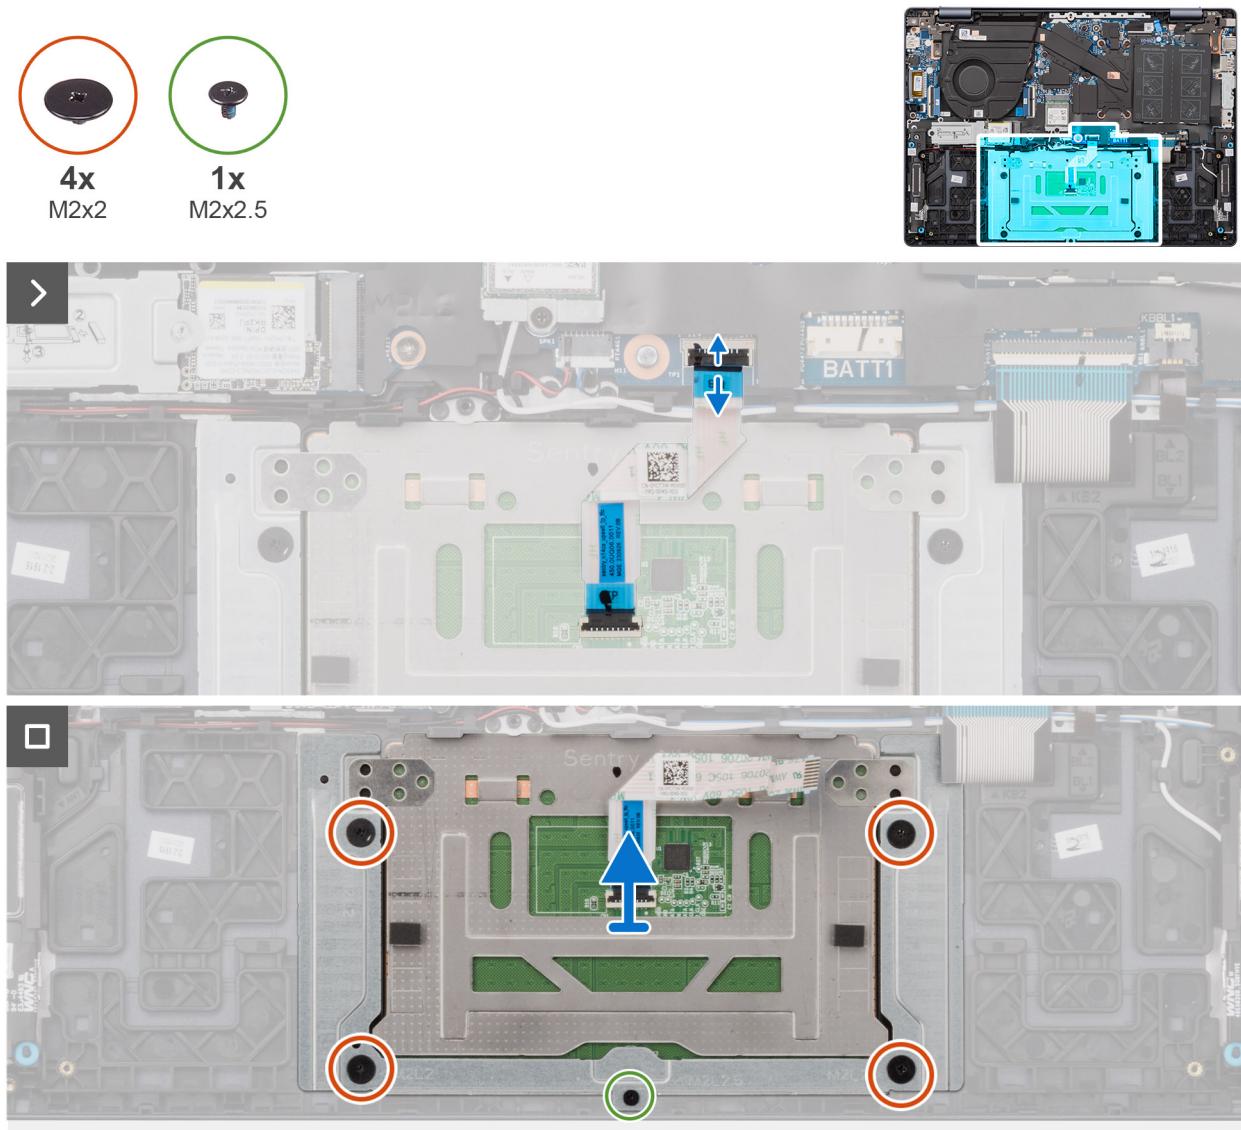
Removing the touchpad (for computers shipped with an aluminum chassis)
